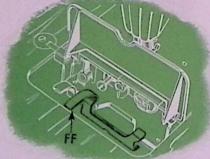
Showing Latch for Releasing Machine from Cabinet
